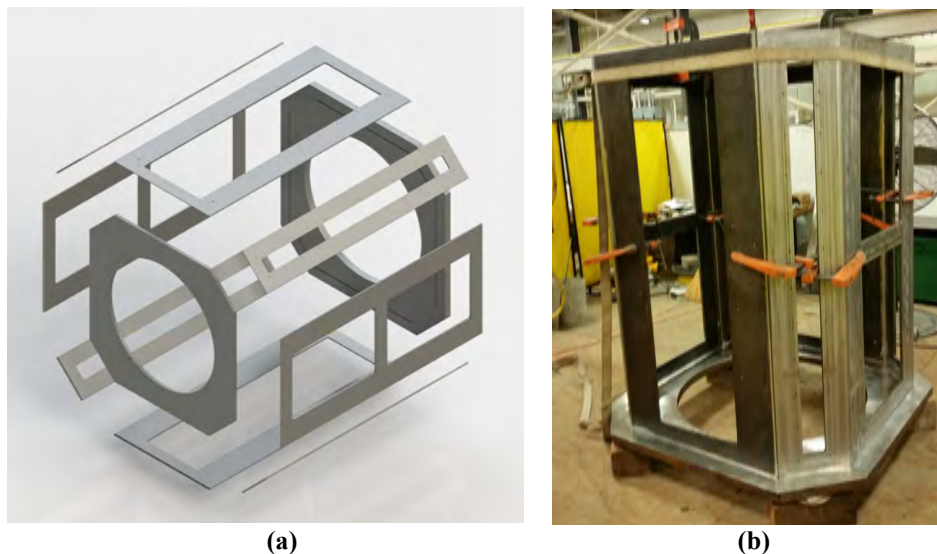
Test section skeleton. (a) Exploded view illustrating construction. (b) Photograph of sections clamped together for welding.
